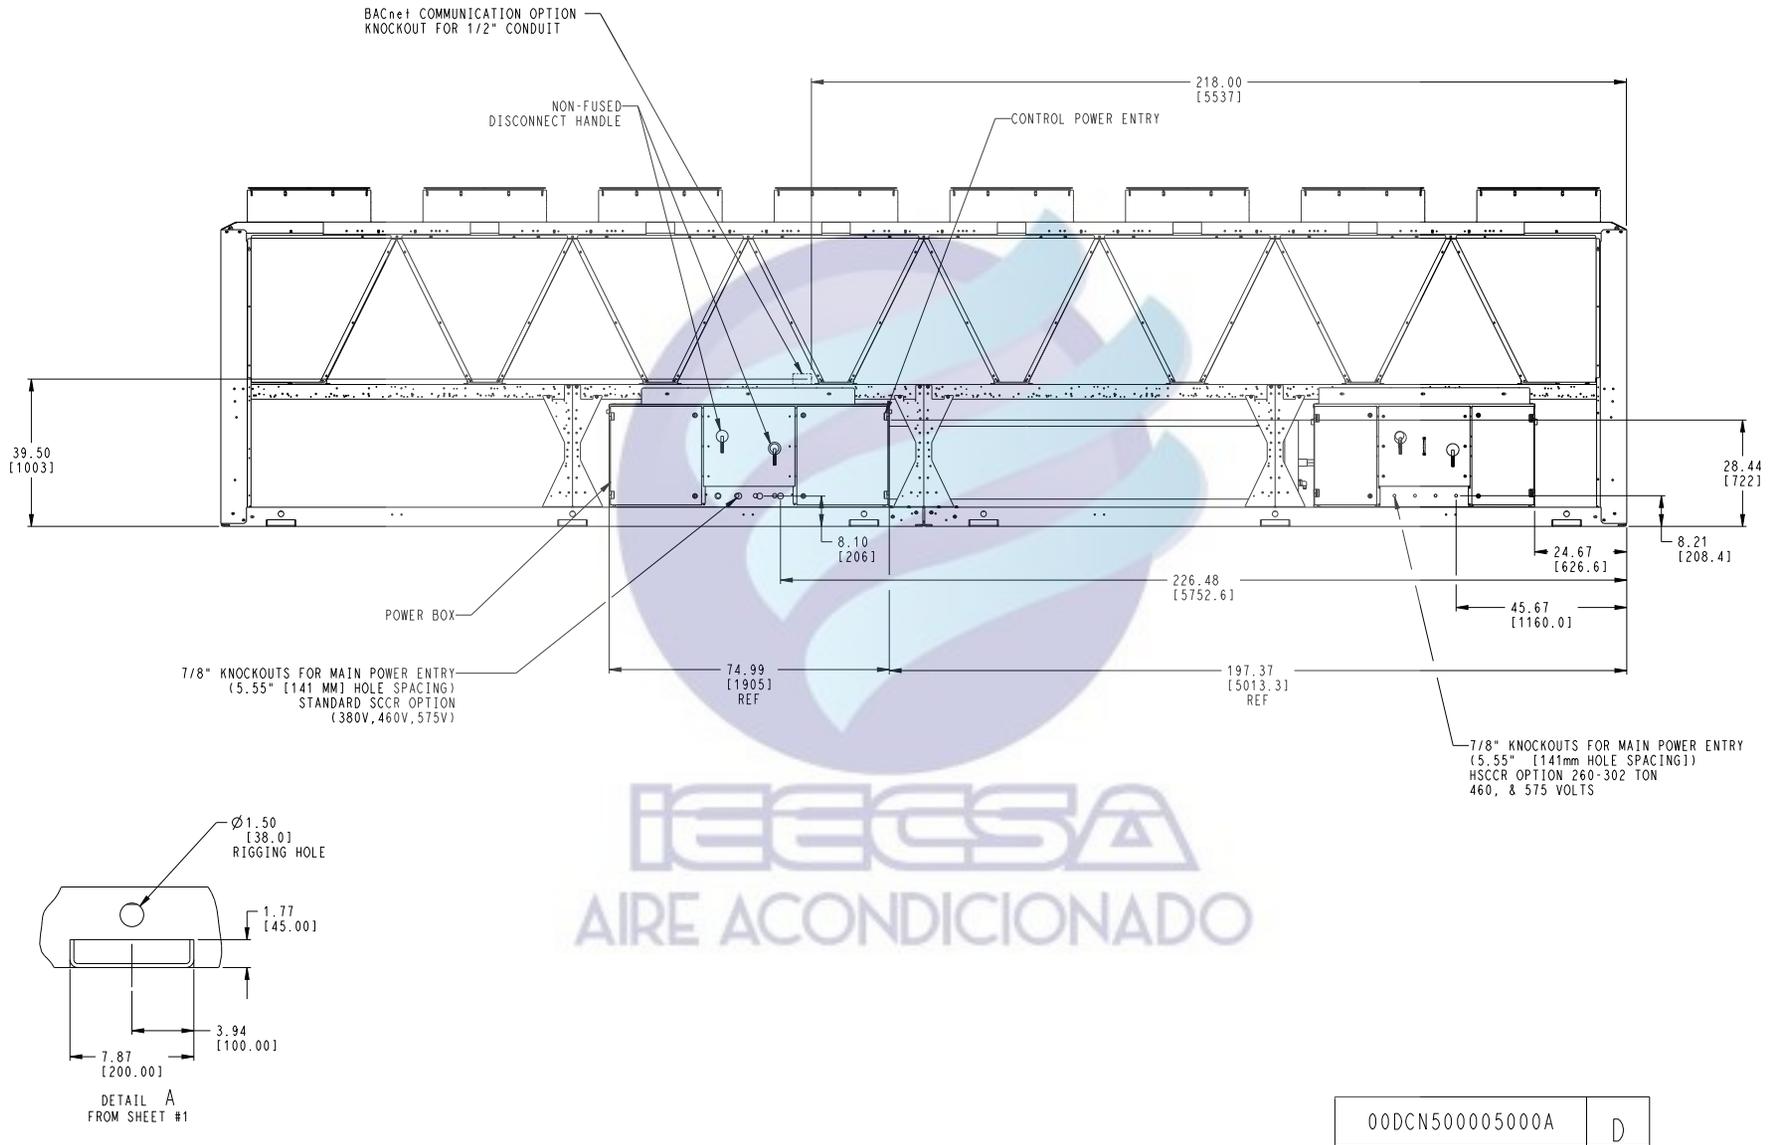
30XA262, 282 Air-Cooled Liquid Chiller Dimensions (cont)
